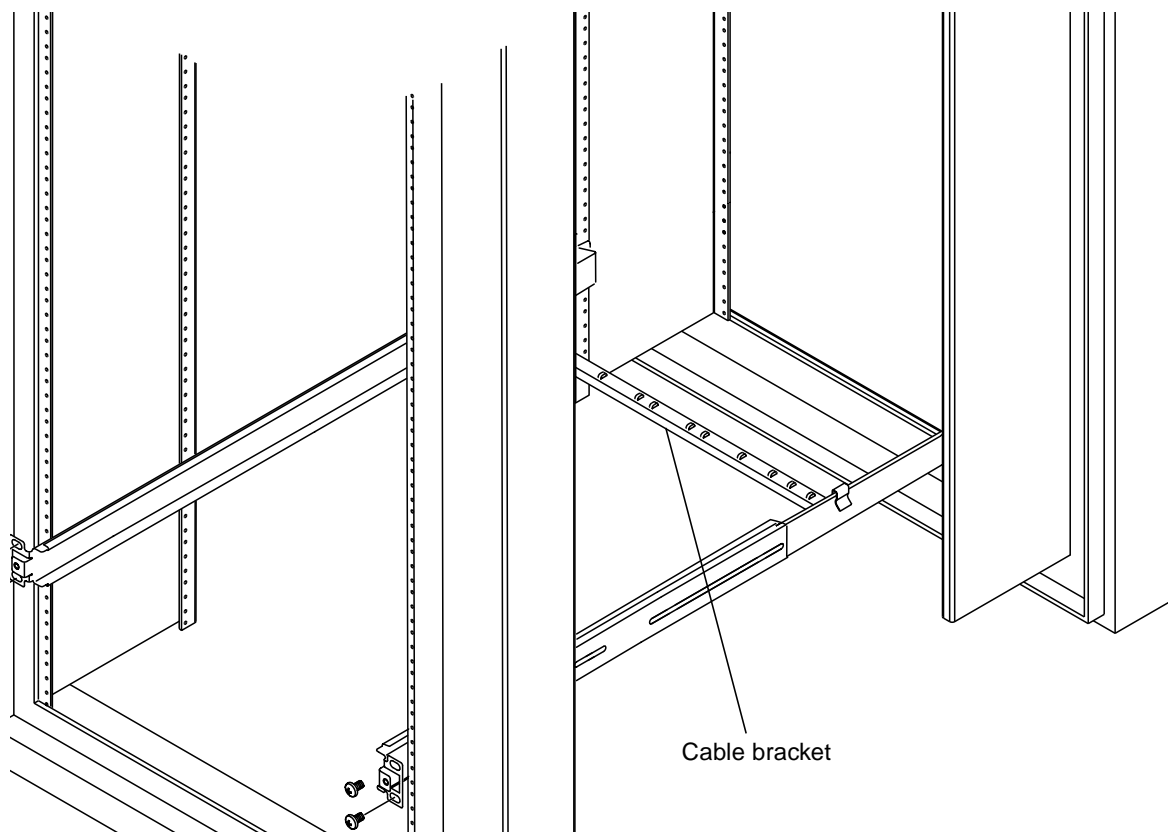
Cable Bracket Installed in Sun 72-inch Expansion Rack
